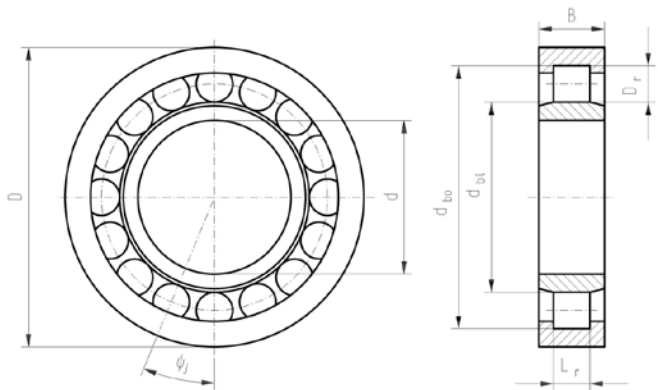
Bearing with radial clearance $g = 0$ before loading with force F_r
